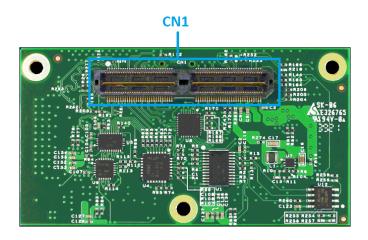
e-CAM56_CUOAGX Base board CN1 connector position
